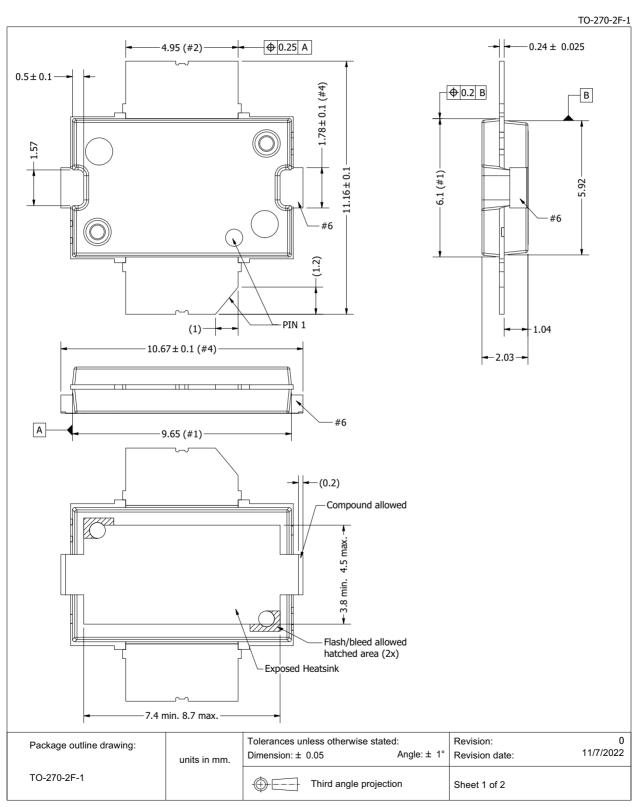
Package outline TO-270-2F-1 (sheet 1 of 2)
